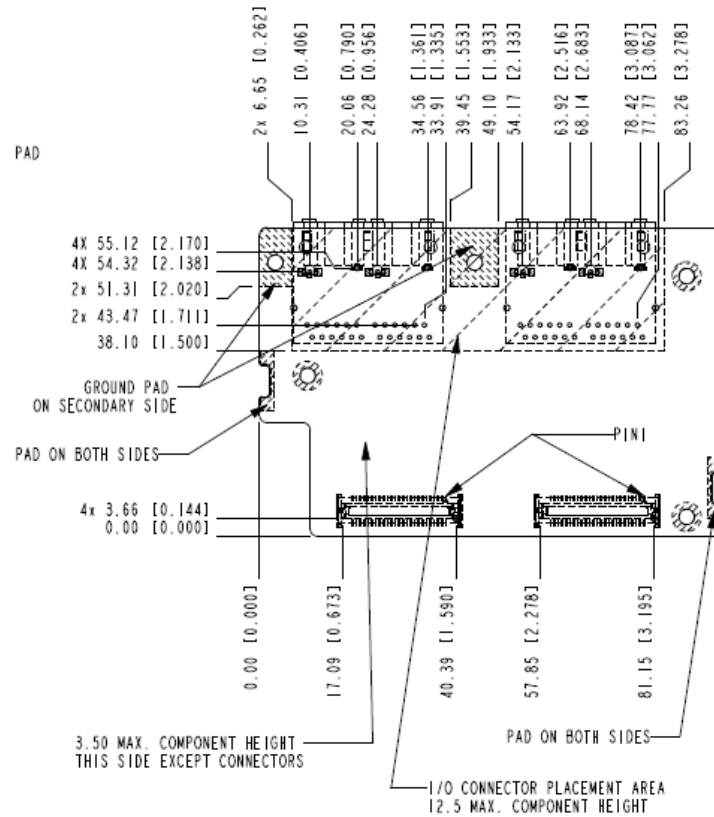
Quad-Port GbE I/O Module Mechanical Drawing
